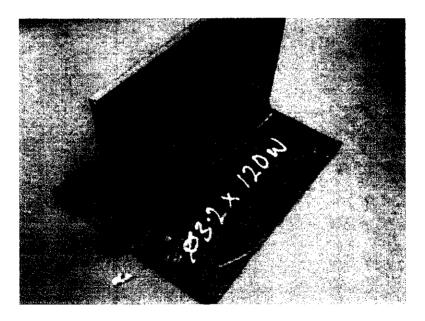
Welded plate with welding voltage, 120V (PLATE 2)
